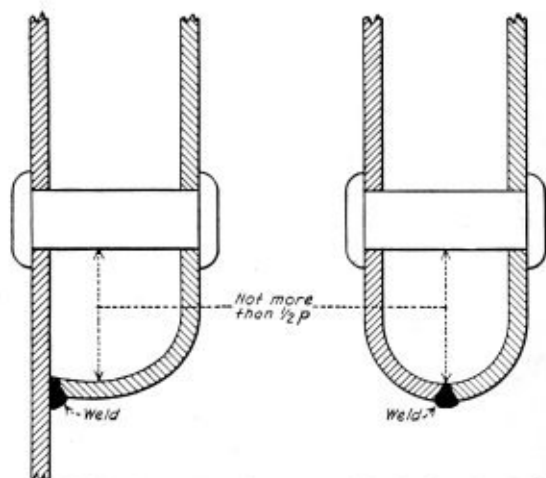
Methods of forming water-leg joints by welding
